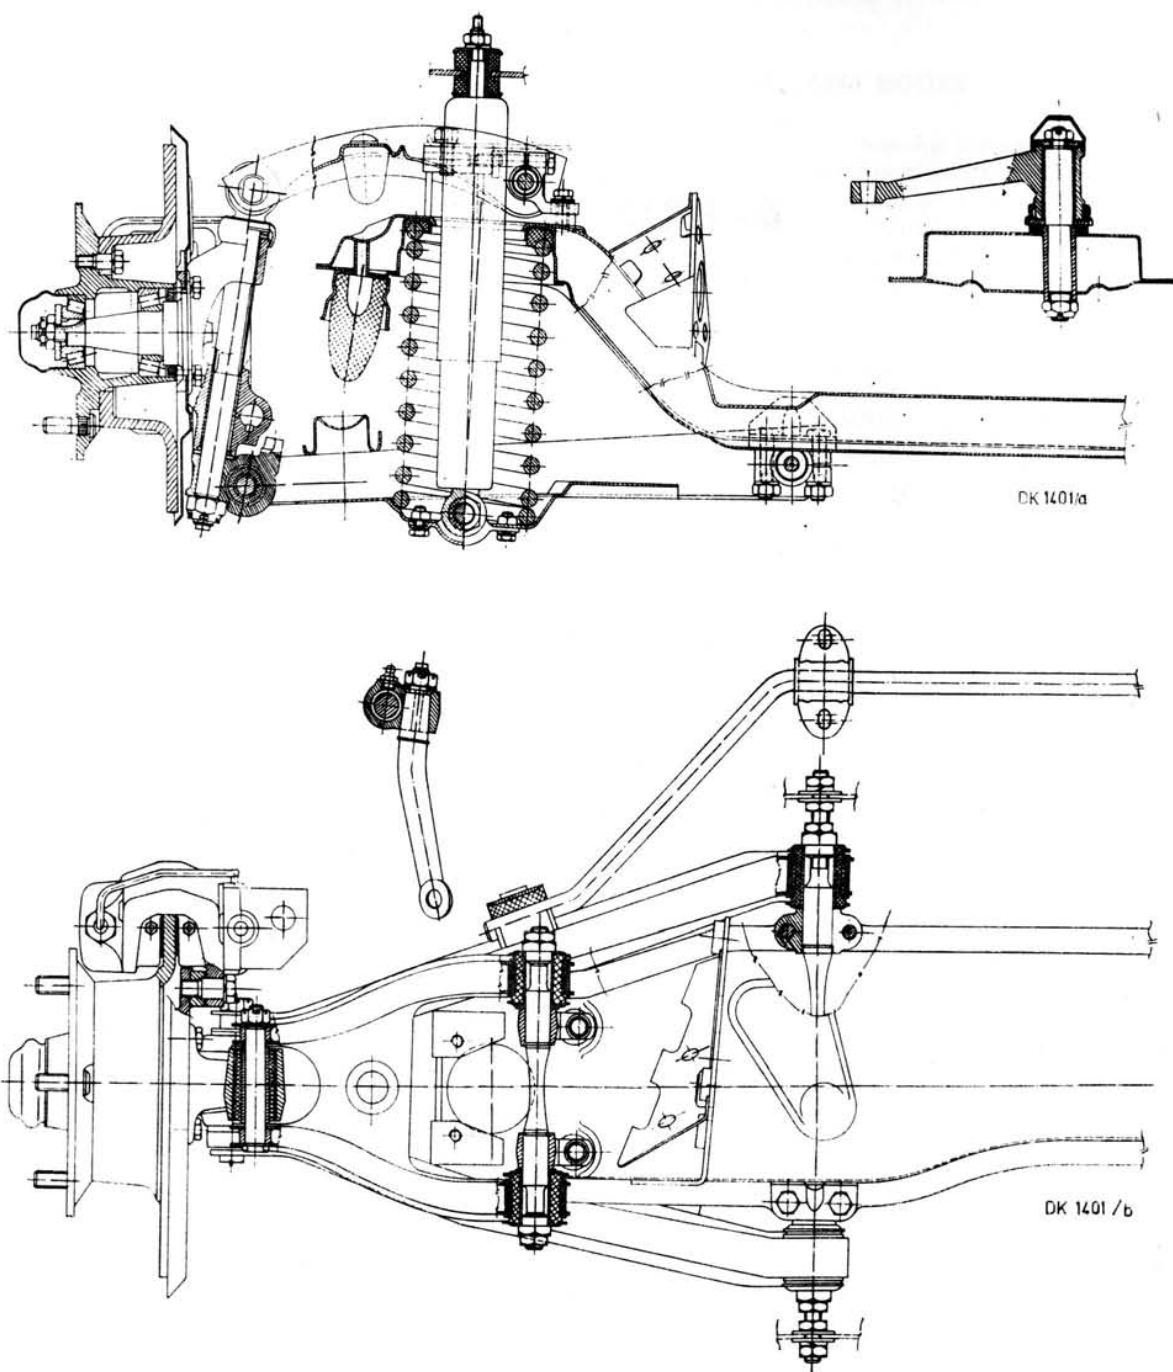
/1 - Front Axle - Sectional View of Half-axle and Steering Knuckle Arm
